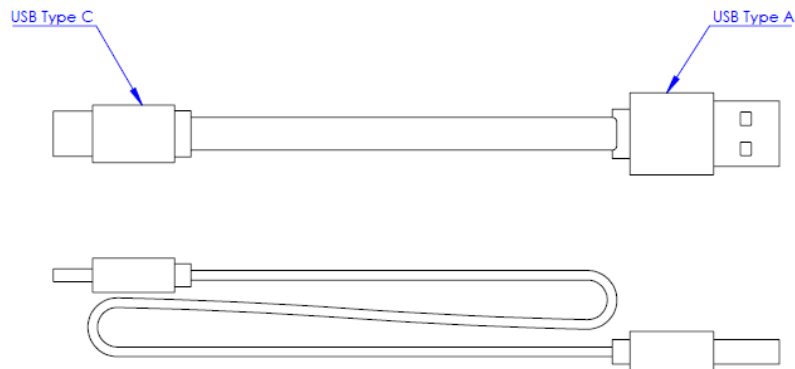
Diagram and dimensions of the Dr. Dabber USB-C Cable - Short. All dimensions are in mm.
